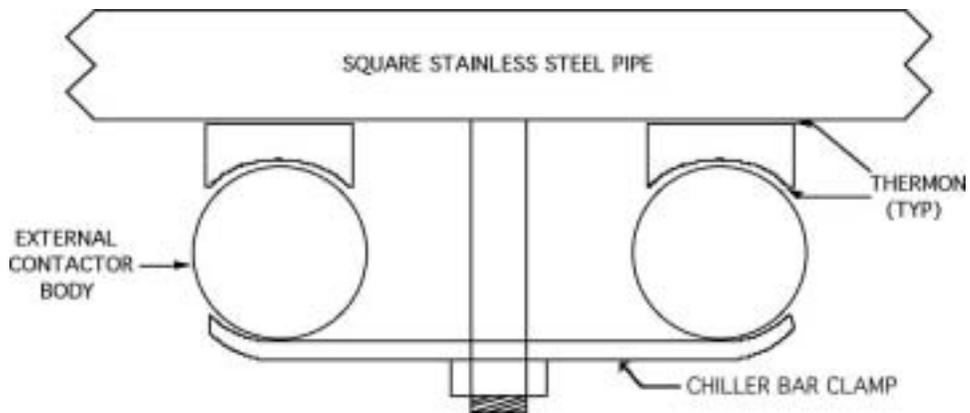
Schematic Showing Chiller Bars Clamped onto the Lower 2-cm Contactor Housing
